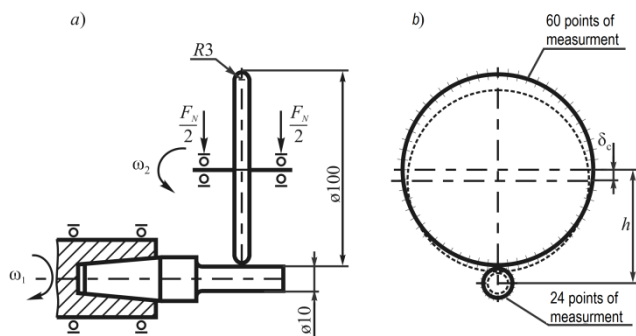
Schemes of: test (a) and measurements (b) for local damages
